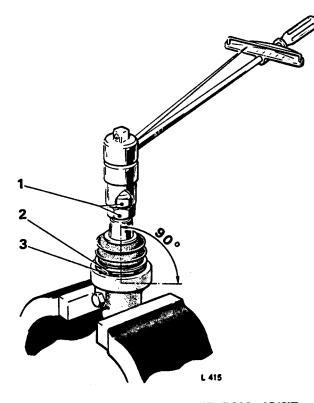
SETTING DAMPER BALL JOINT PRE-LOAD
